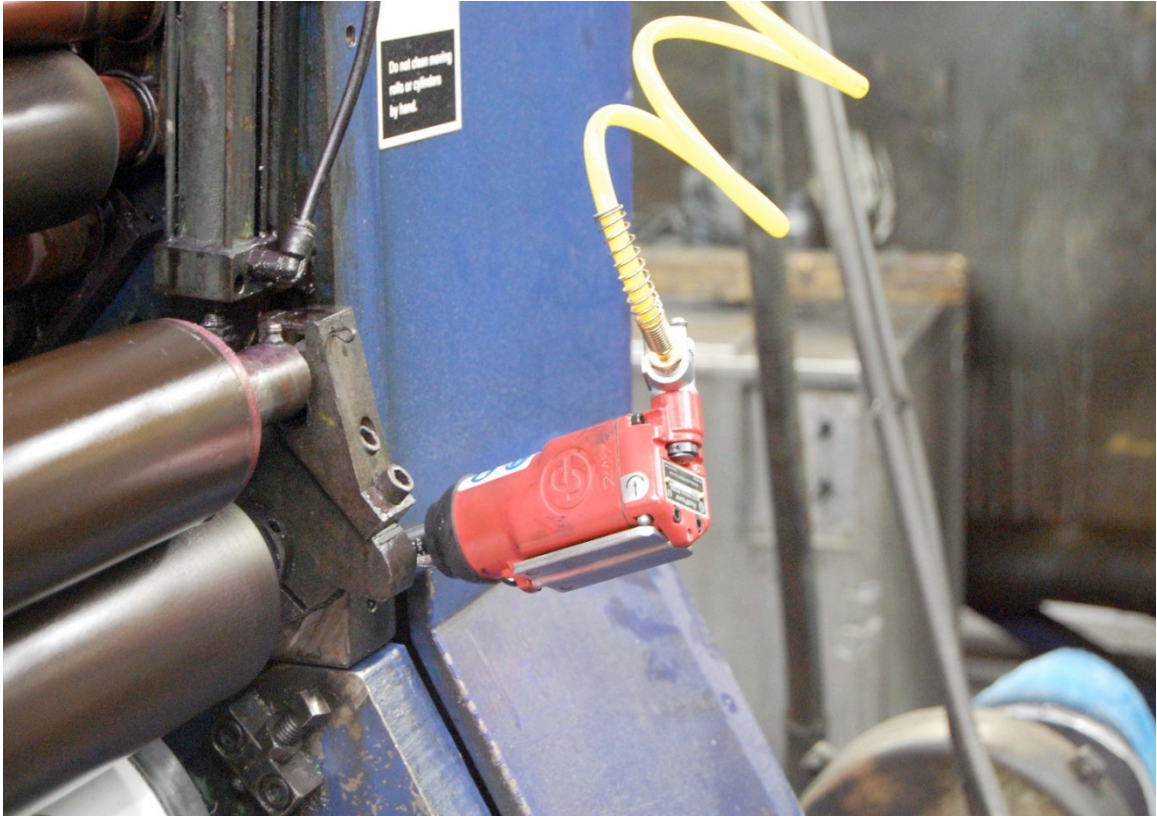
Pneumatic wrench used for upper bolts on Stevens Press
